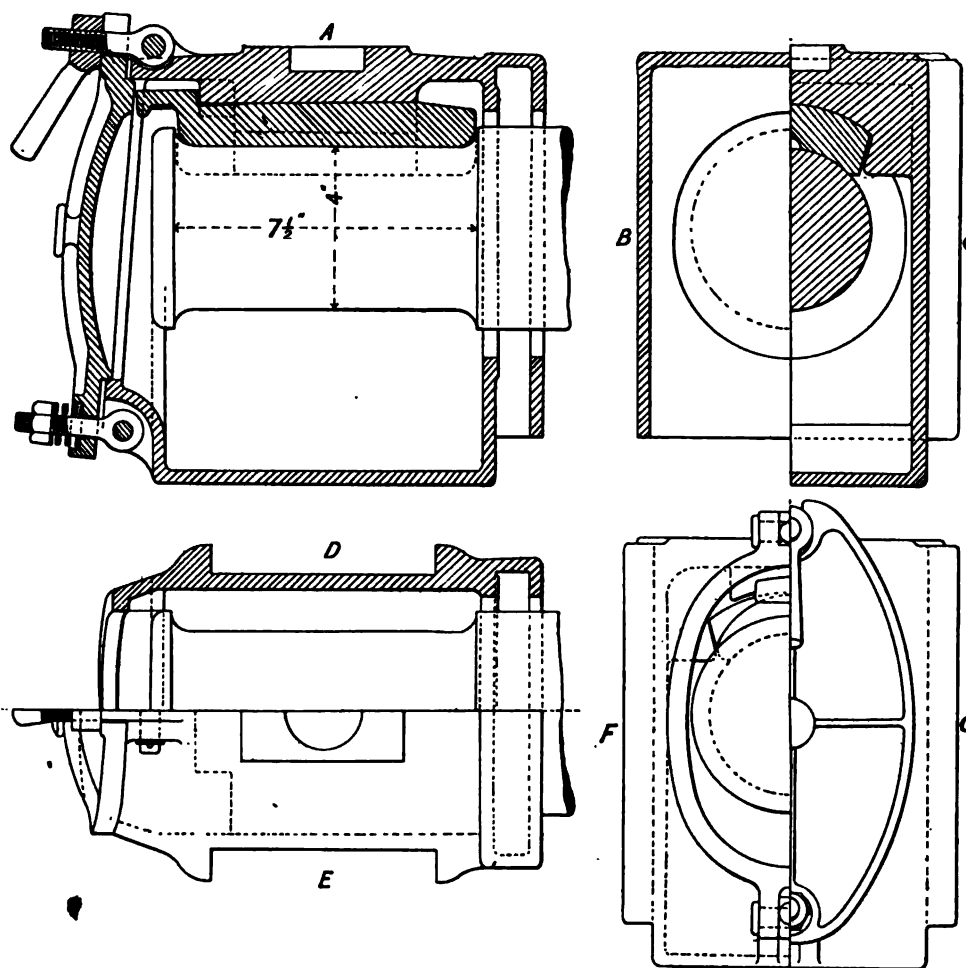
Axle Box for Six-Wheeled Car Bogie Horse Box. (Gloucester Carriage & Wagon Co., Ltd.)
